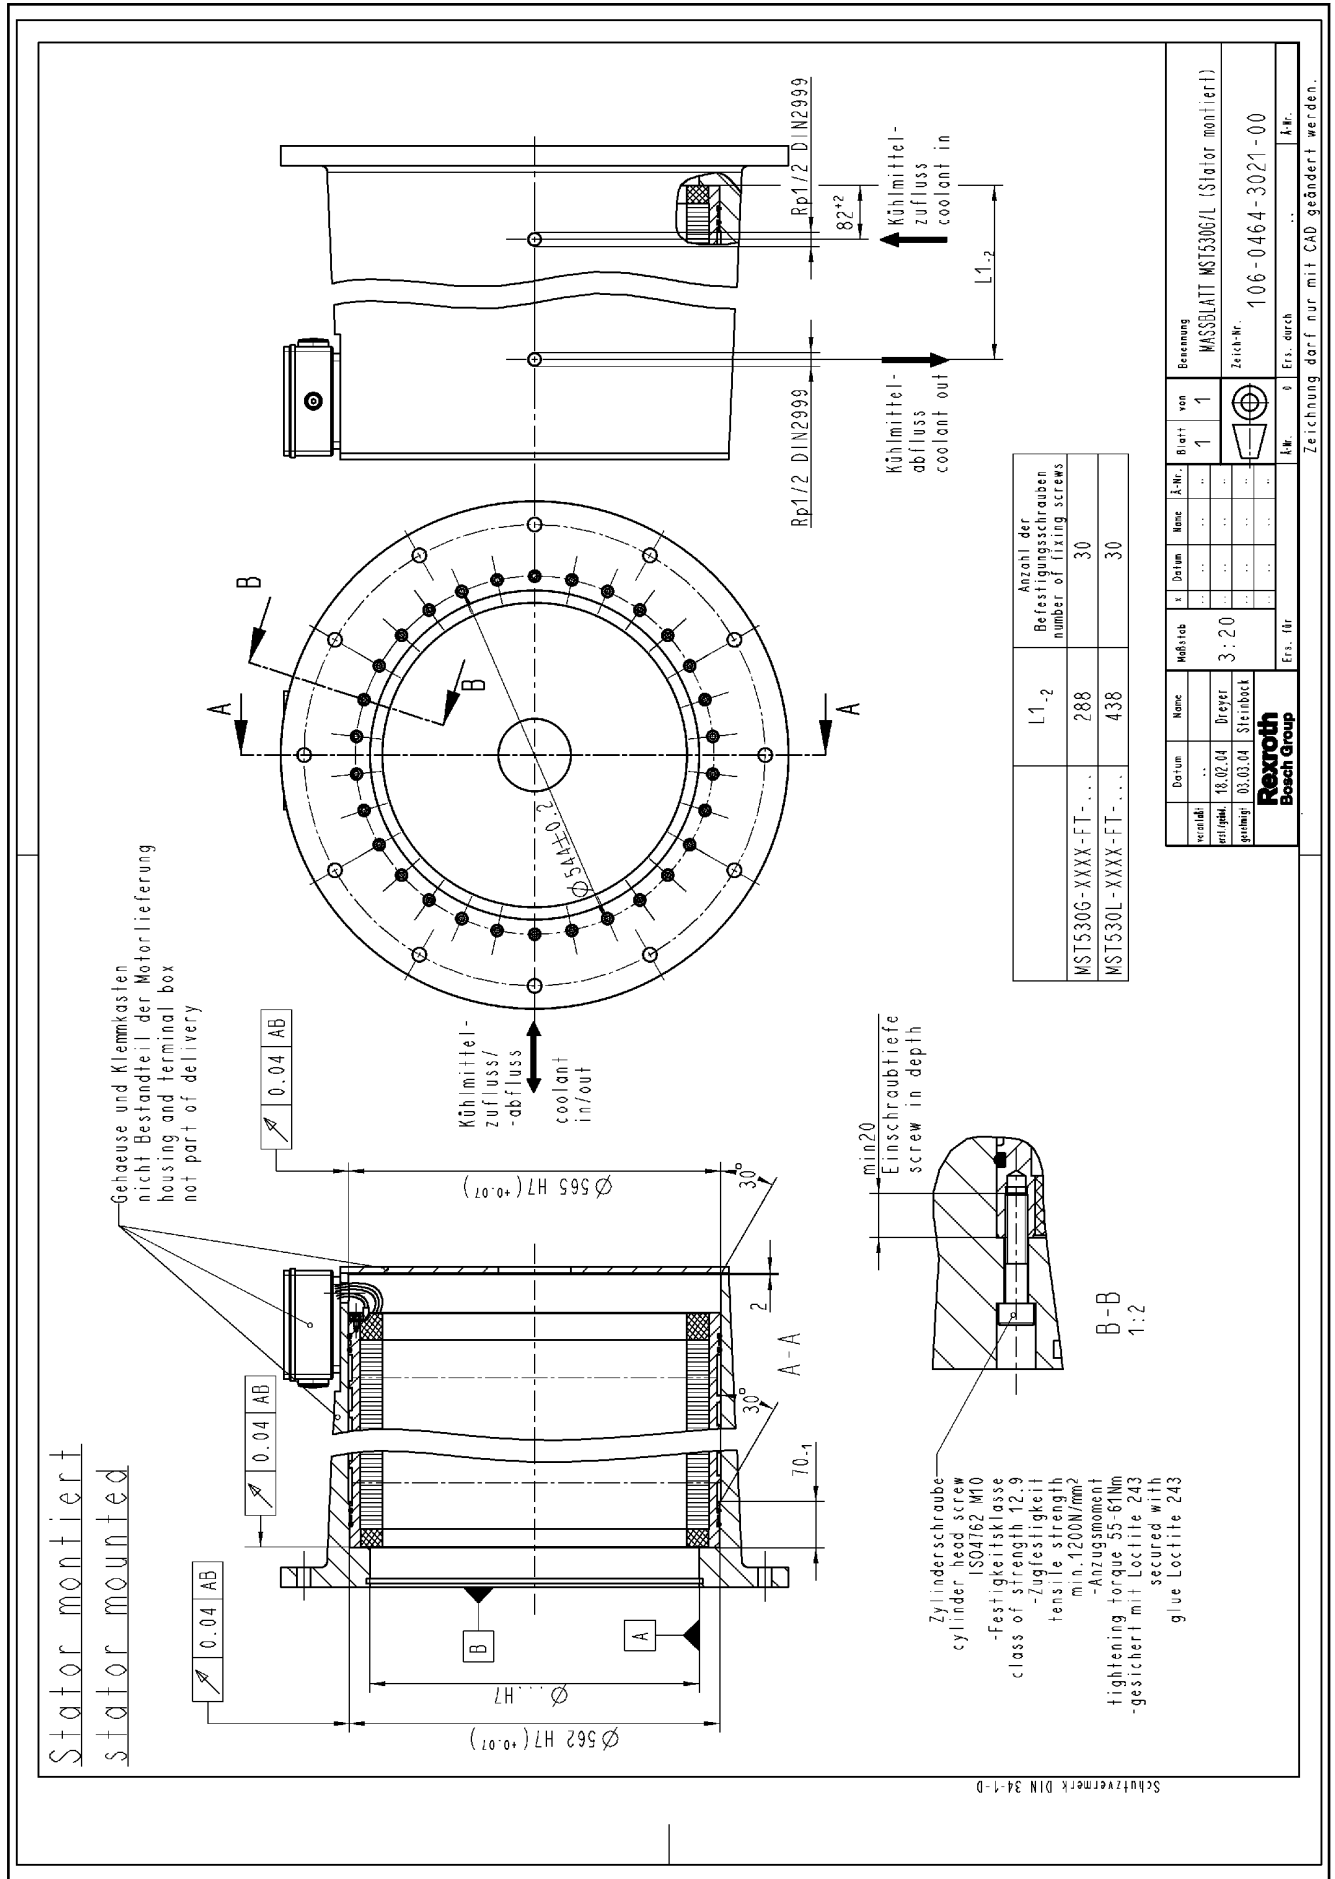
Dimension sheet for stator, mounted - MST530G, 530L
